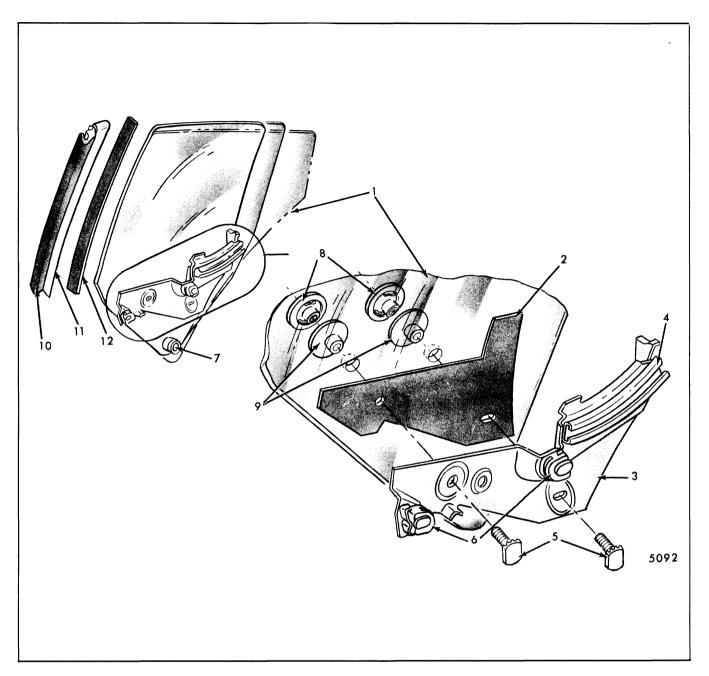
Rear Quarter Window Assembly - "B, C and E" Styles
